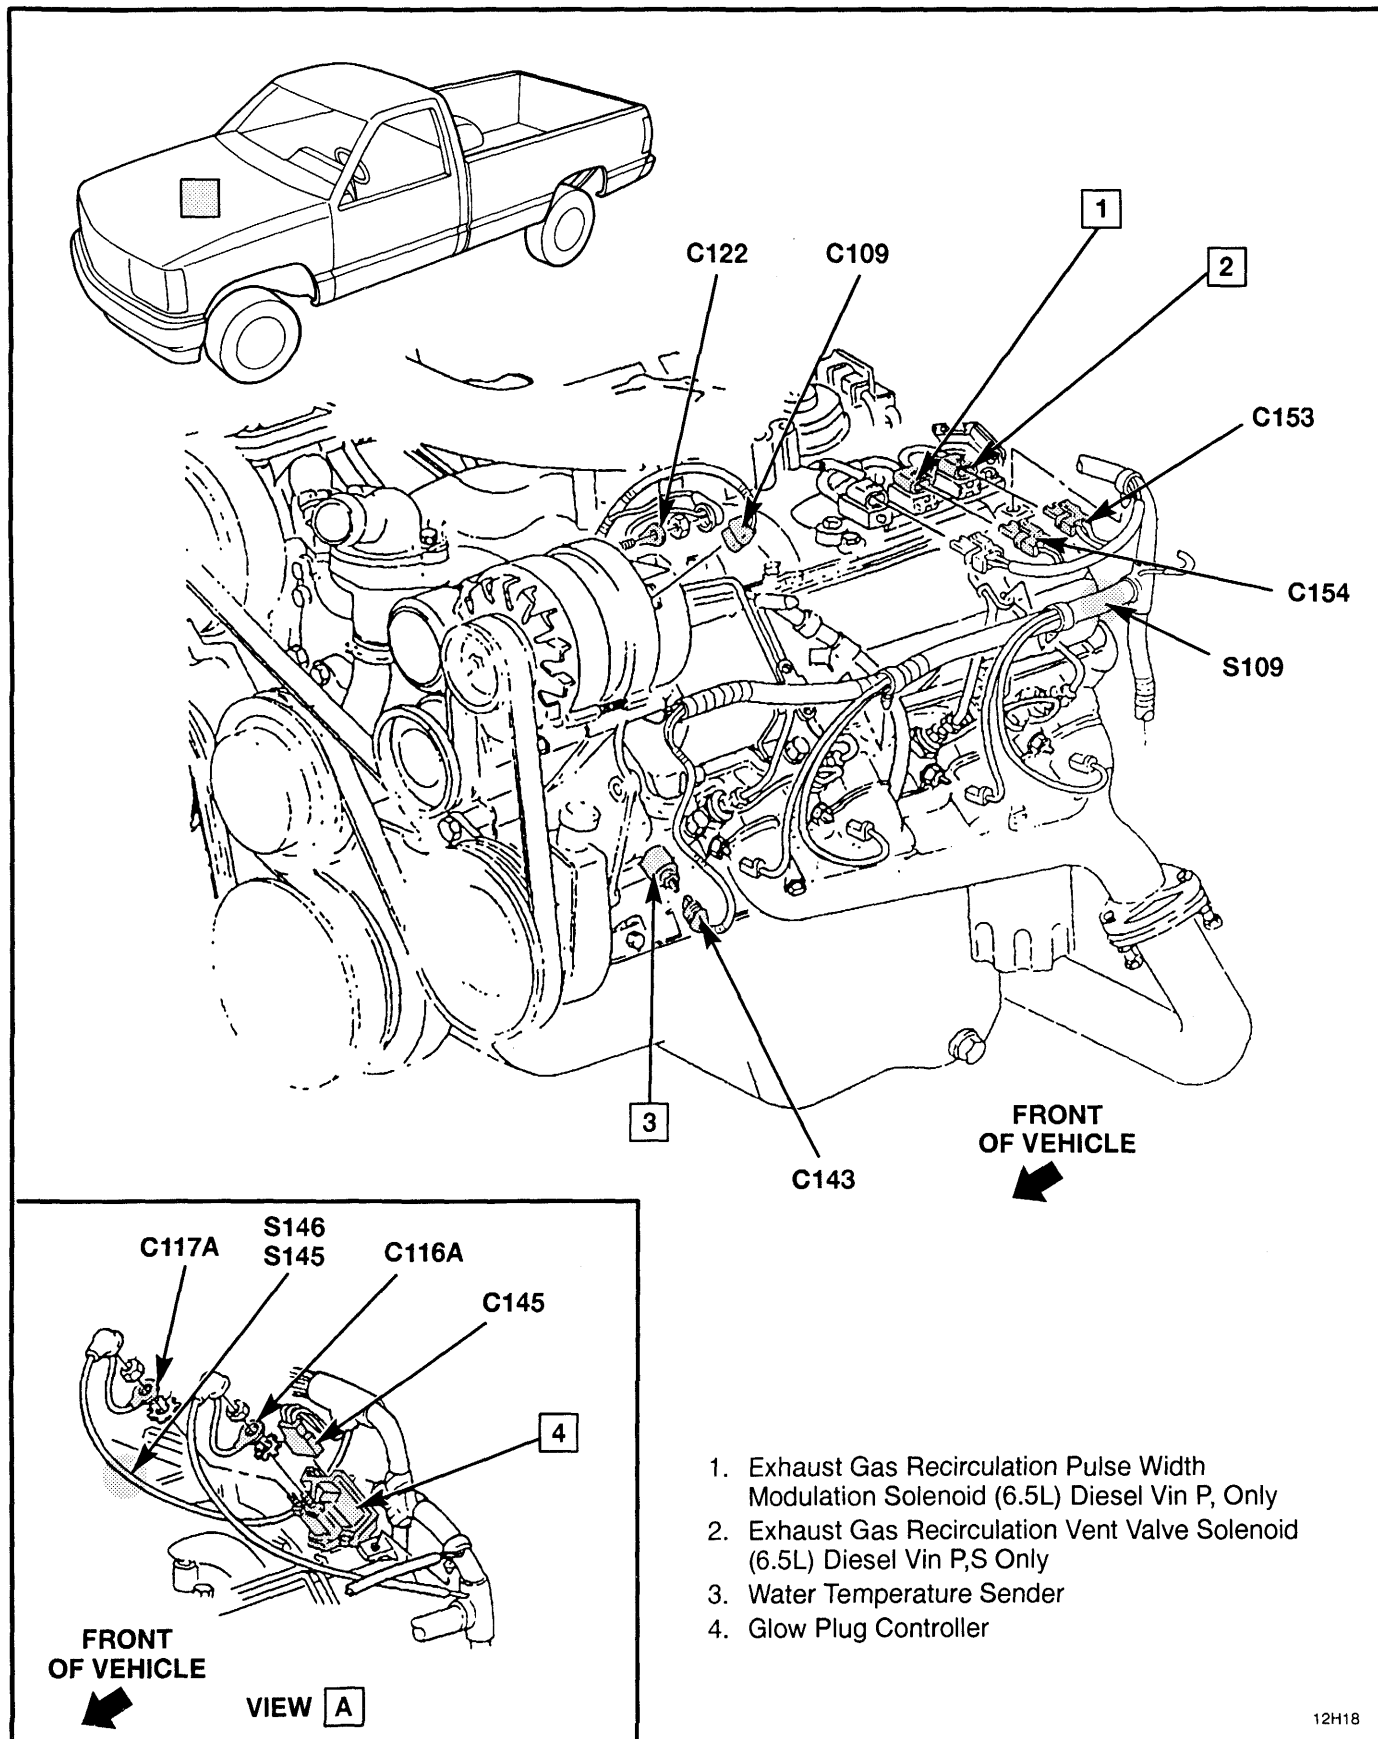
6.5L Diesel Engine Wiring, LH Side
